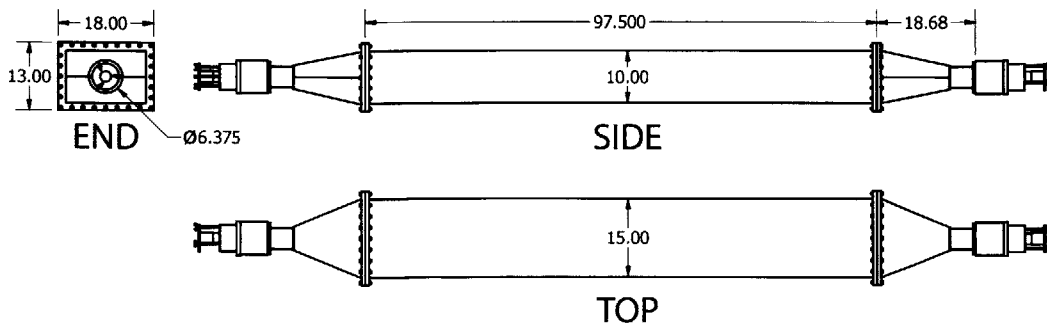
A CAD drawing of the neutron detector. Given dimensions are in inches.
